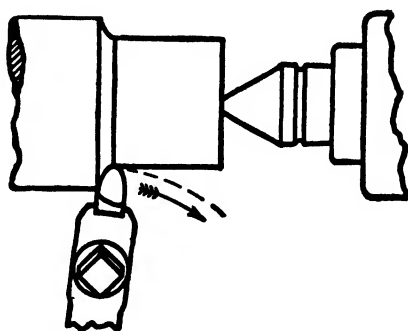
Mount the toolholder in the tool post so that in case it slips, it will swing away from the work and not gouge. (South Bend Lathe Works)
